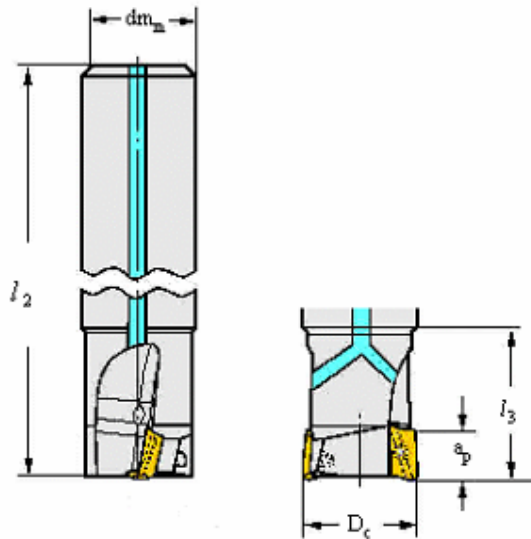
Two fluted end milling cutter assembly (Tool holder dimension: $D_c = 25$ mm, $dm_m = 25$ mm, $l_2 = 210$ mm, $l_3 = 50$ mm, maximum $a_p = 10$ mm, $\kappa_r = 90^\circ$)
